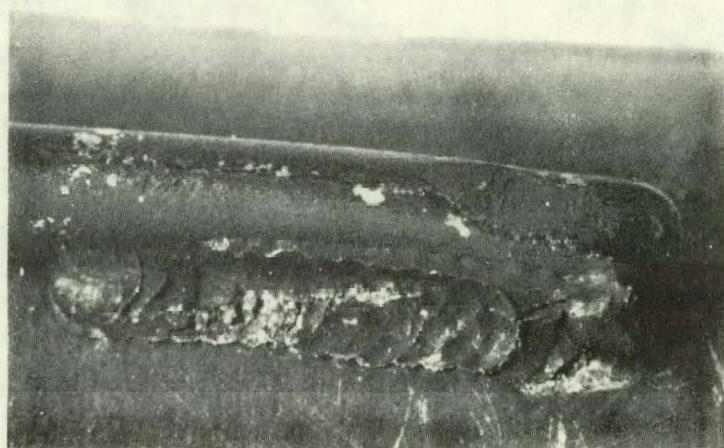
Final inspection of junction at the 10-inch elevation. This side was a reweld and corroded more than did normal welds.
